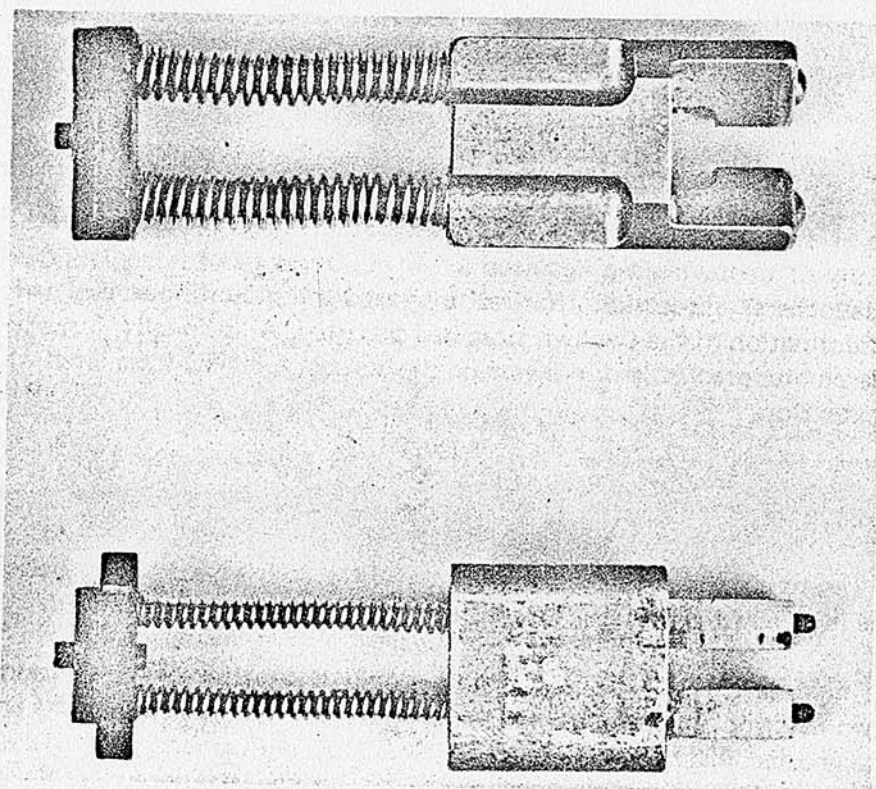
Top View of the Modified Follower Assembly (TOP) and the Original Assembly (BOTTOM).
